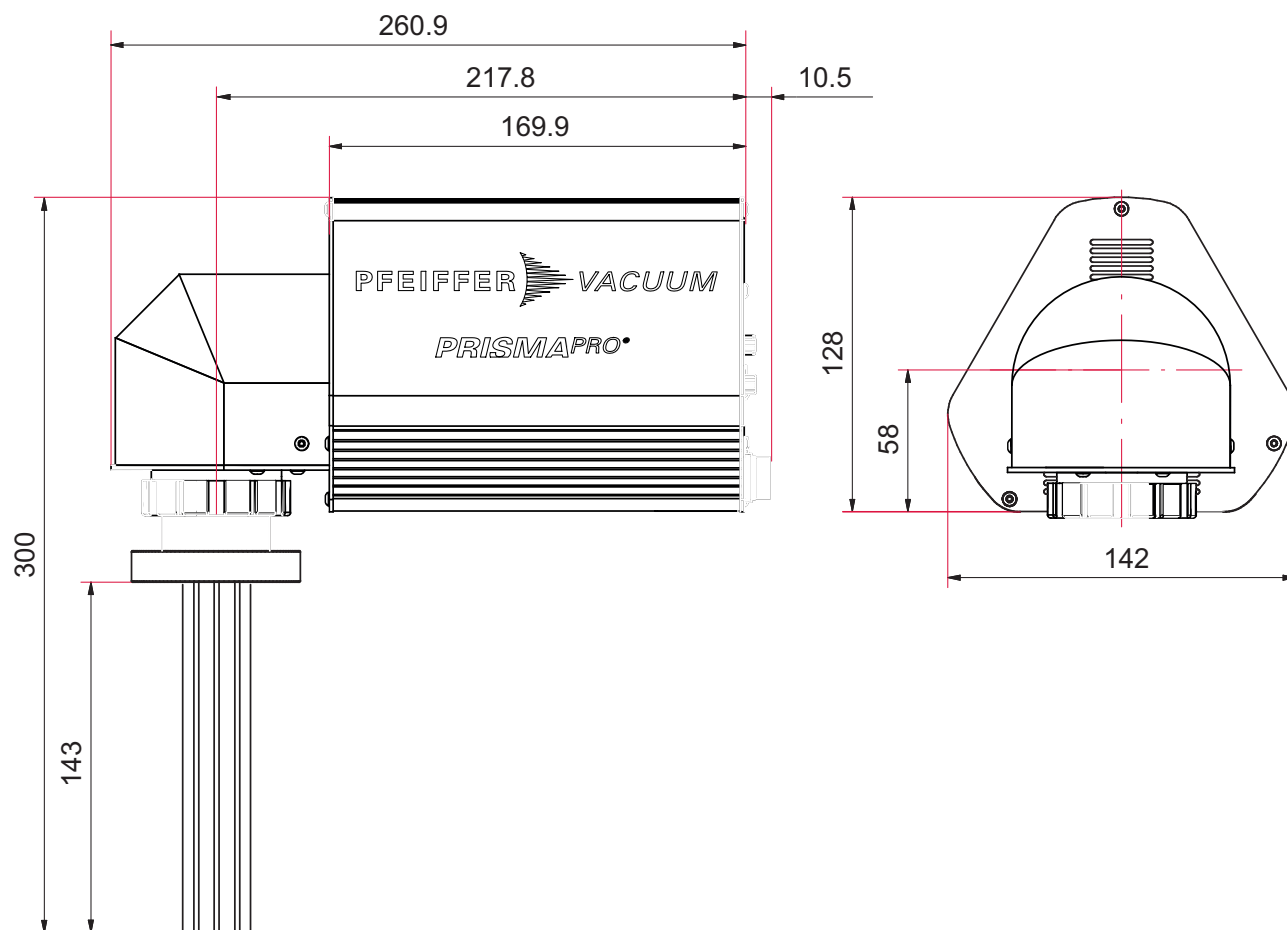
Dimensions QMG 250 F / SI ouverte / QME 250 90°
